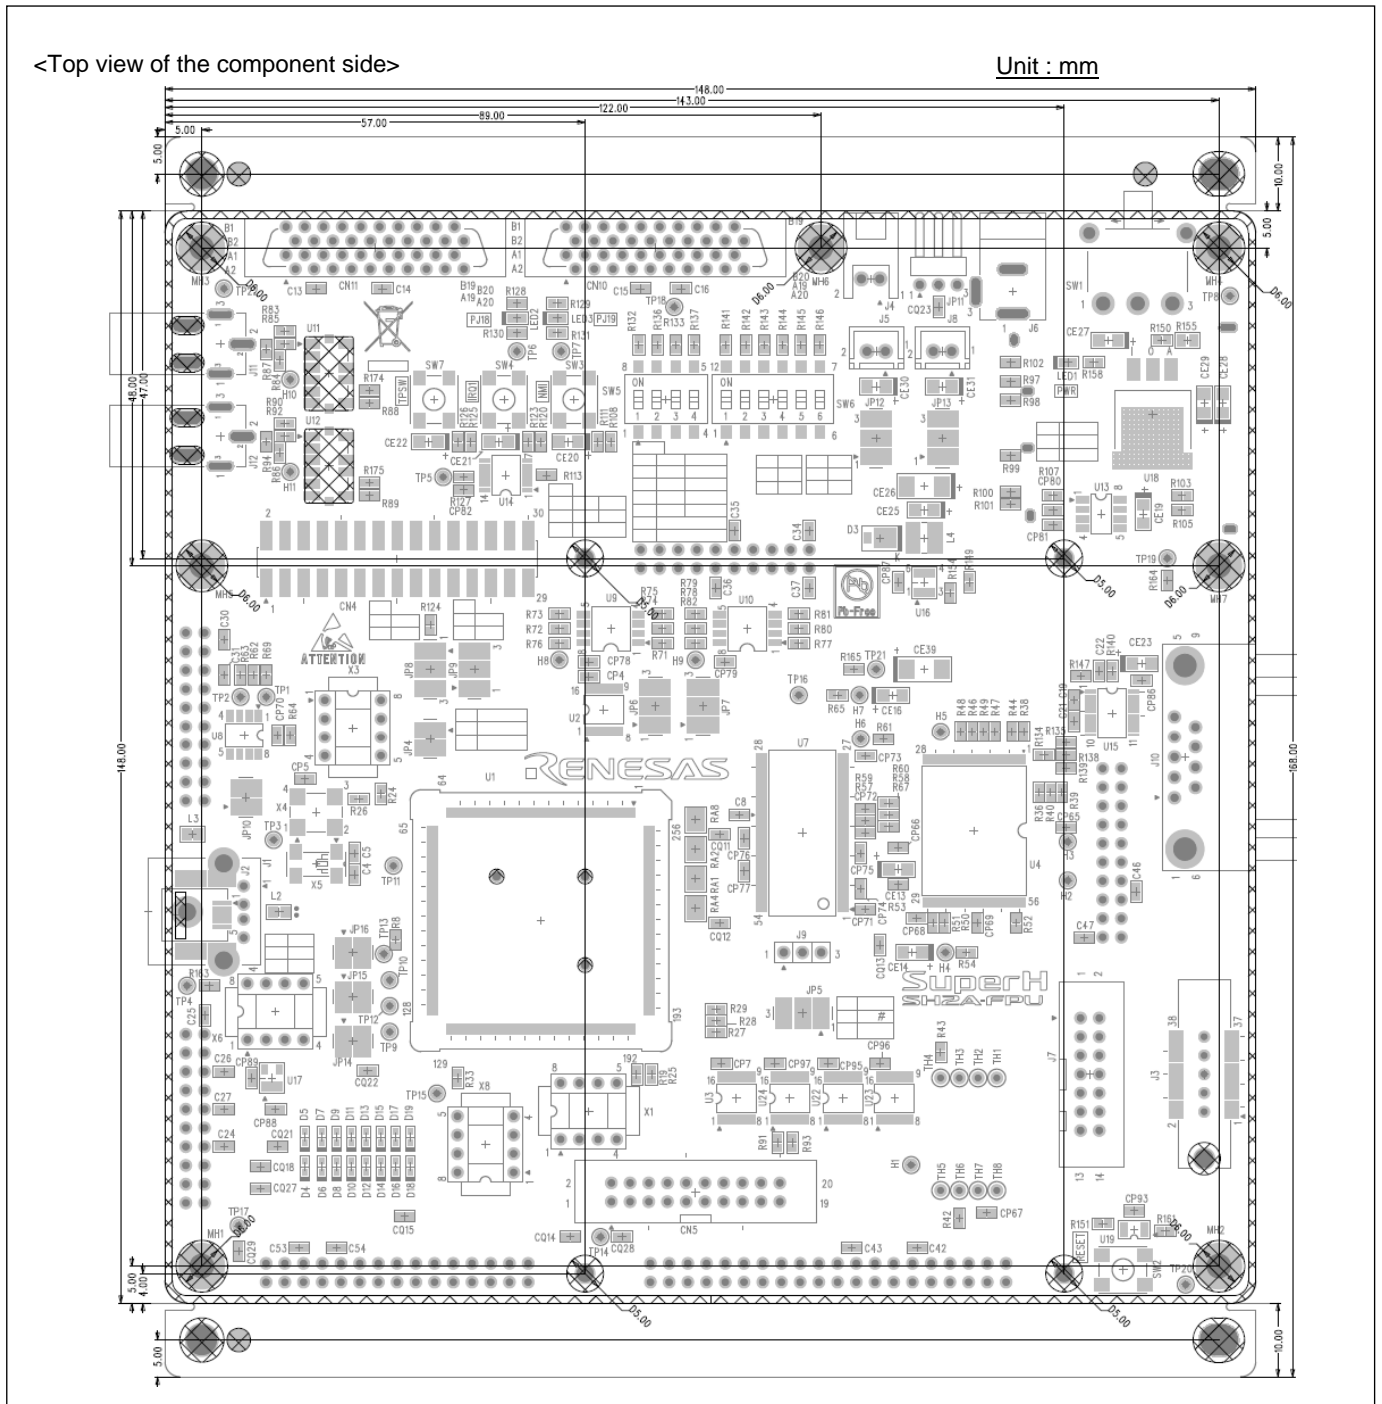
R0K572690C000BR Dimensions 1 (Top view of the component side)
